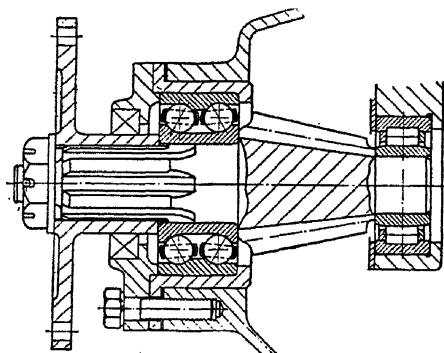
Straddle Mounting for the Bevel Pinion Gear Shaft.
